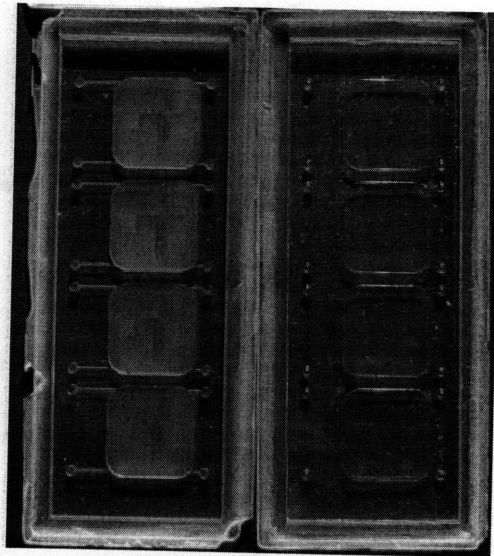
PDMS molds cast from a master mold before and after vapor polishing.
